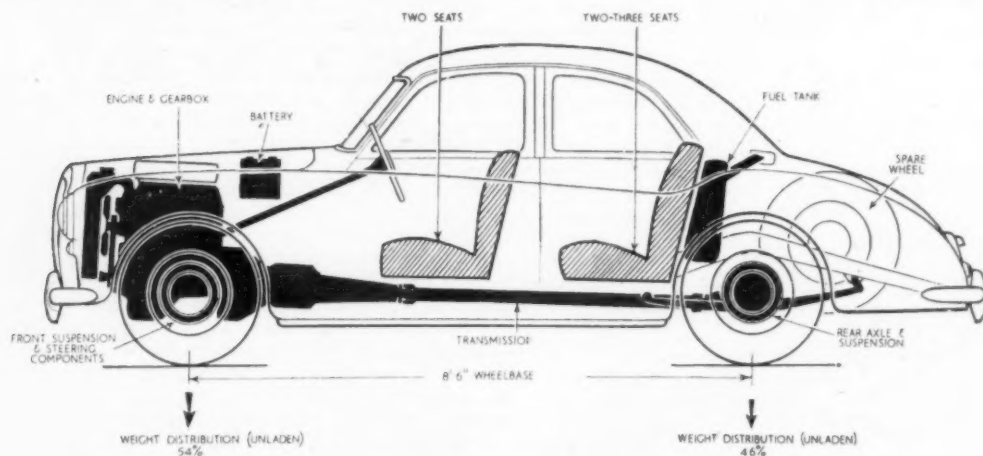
shows a modern design with the engine placed well forward, both front and rear seats being comfortably within the wheelbase.
